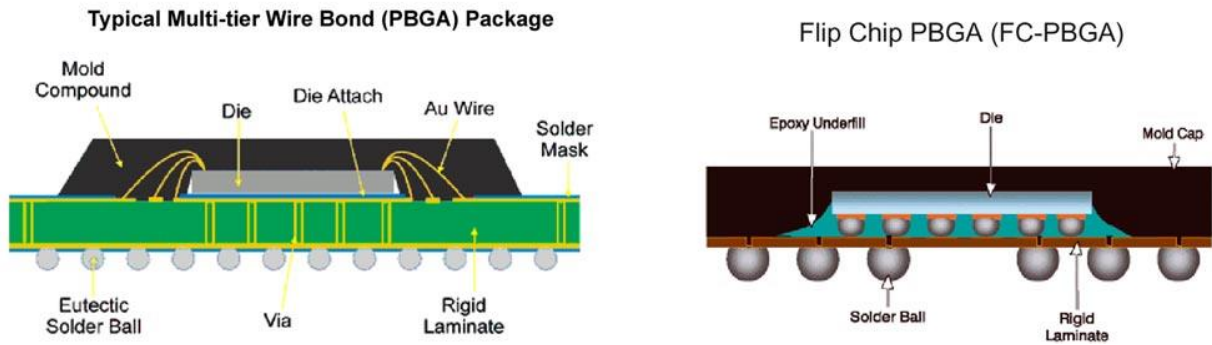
Assembled plastic ball-grid-array (PBGA) package, in which the IC die is attached to the chip holder by (a) wired bond and (b) flip chip [4].
